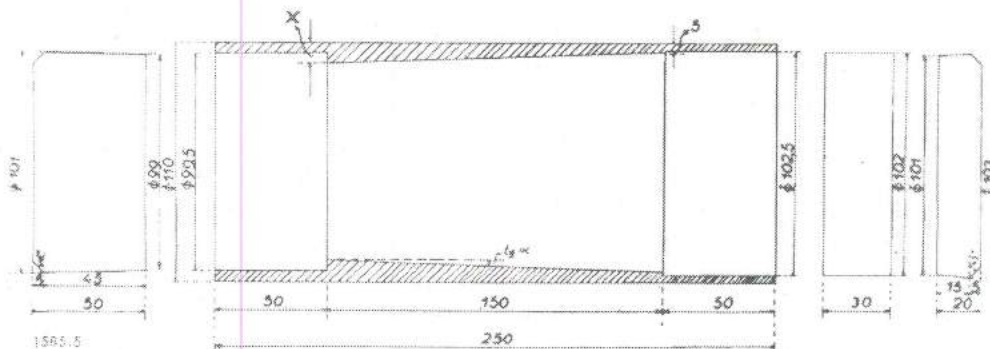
Longitudinal cross-section of extrusion cartridge (dimensions in mm)
